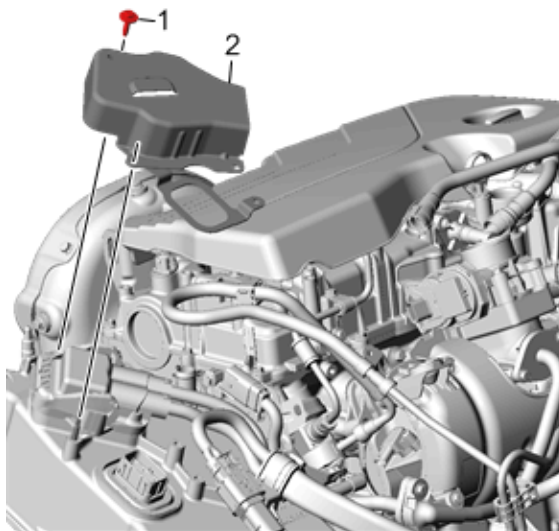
T6 Power Inverter Module X2 HV Cable Cover And Remaining Bolt
